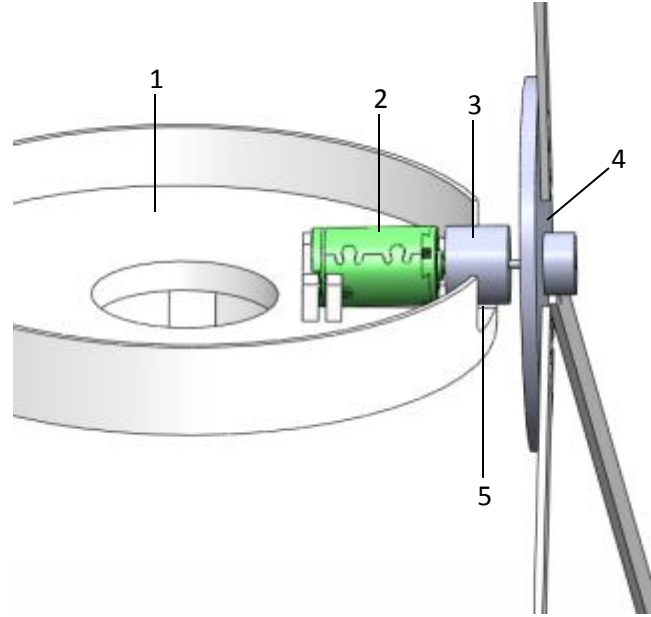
Side view of nacelle assembly. The components shown are as follows: 1- Nacelle platform, 2- Motor, 3- Gearhead, 4- Hub (press fits onto axis of gearhead), 5- indentation for accommodating motor
